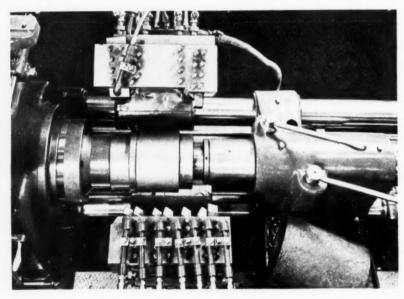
Close-up View, Showing Cylinder Barrel Mounted Between the Hydraulically Operated Internally Gripping Headstock and Tailstock Fixtures Used in the Set-up Shown in Fig. 1
